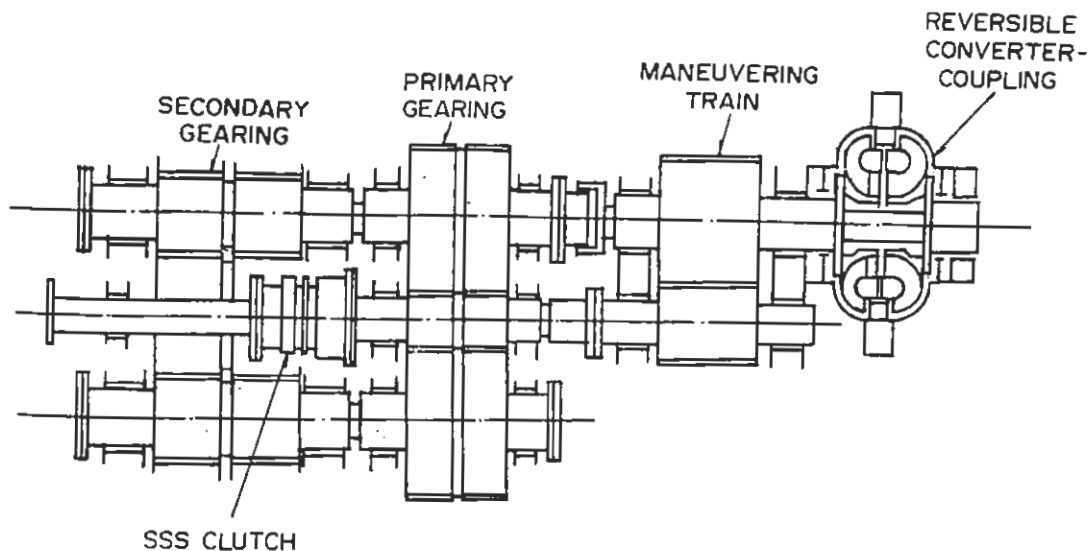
Arrangement of Modern Reversing Reduction Gear
